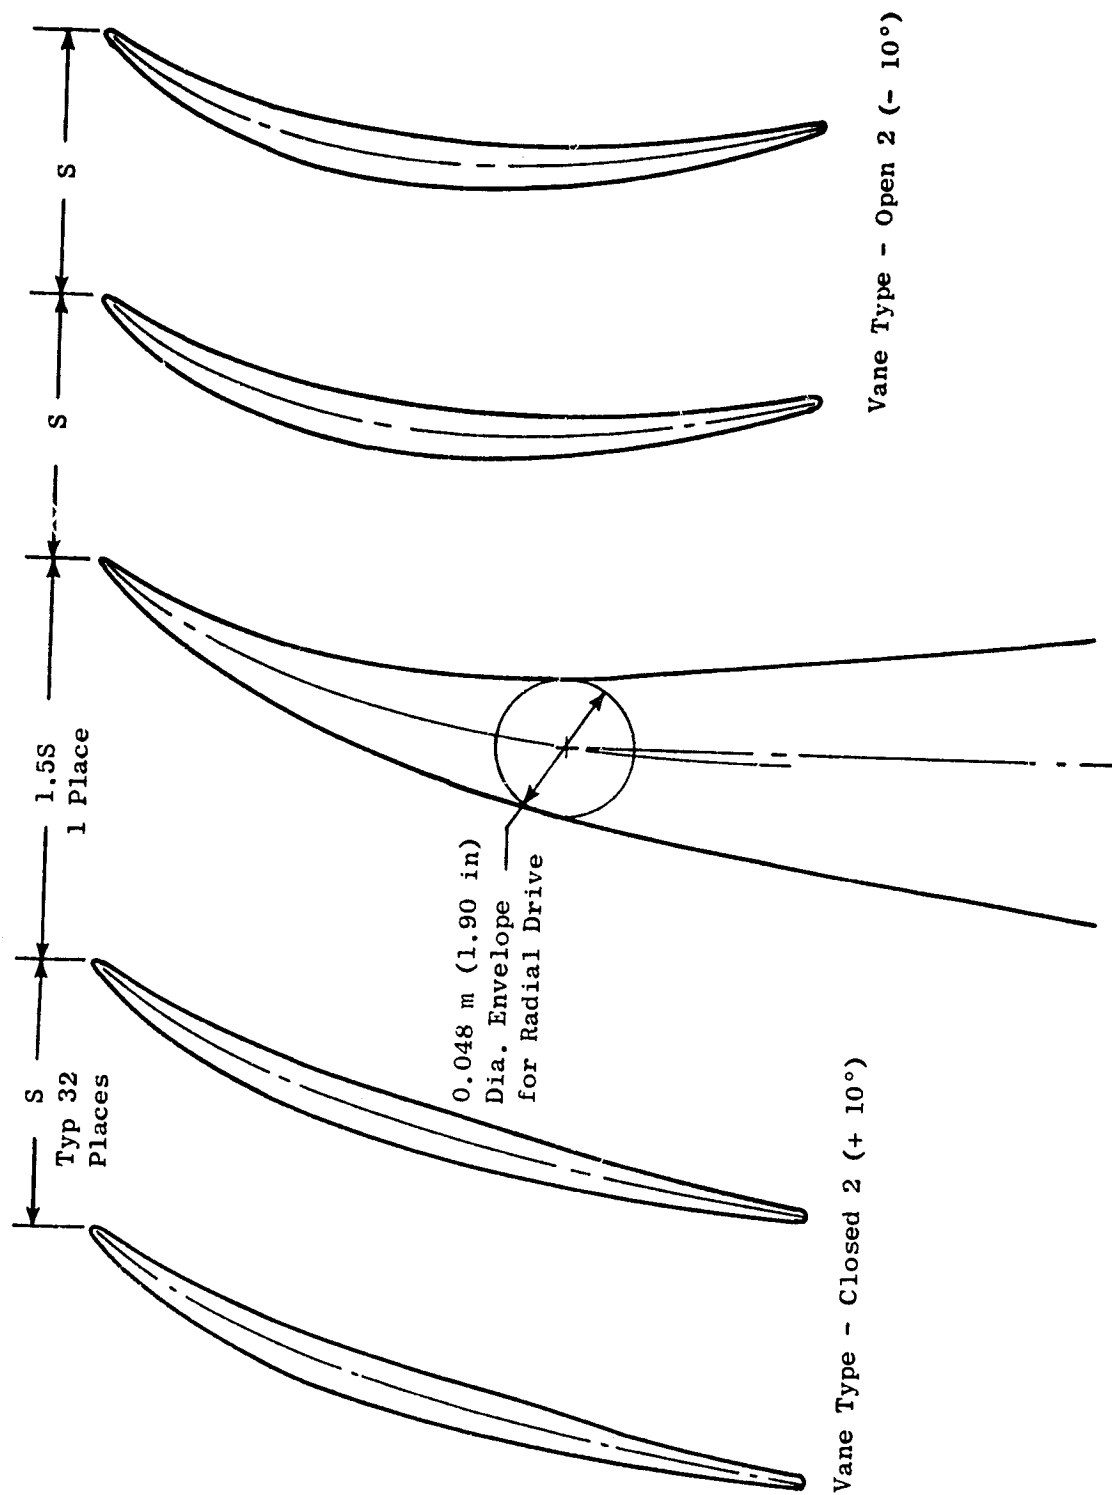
Vane-Frame Unwrapped Section at ID, 32 Vanes Plus Pylon LE Fairing.
